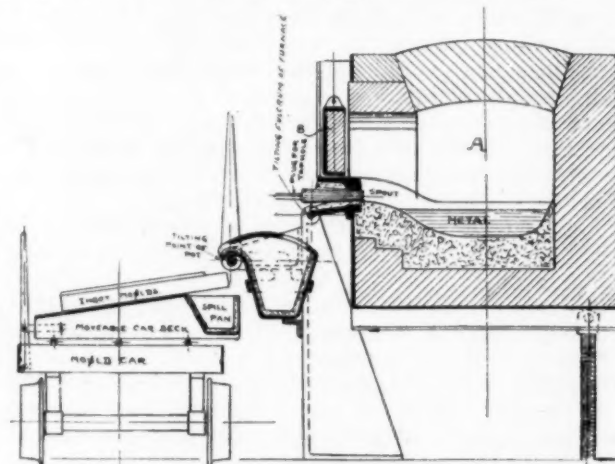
COMPLETE SILVER MELTING EQUIPMENT
